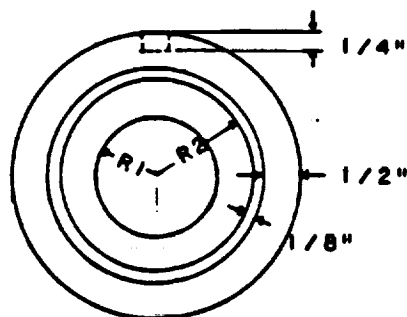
Schematic Side View of Experimental Damper Bearing Configuration
